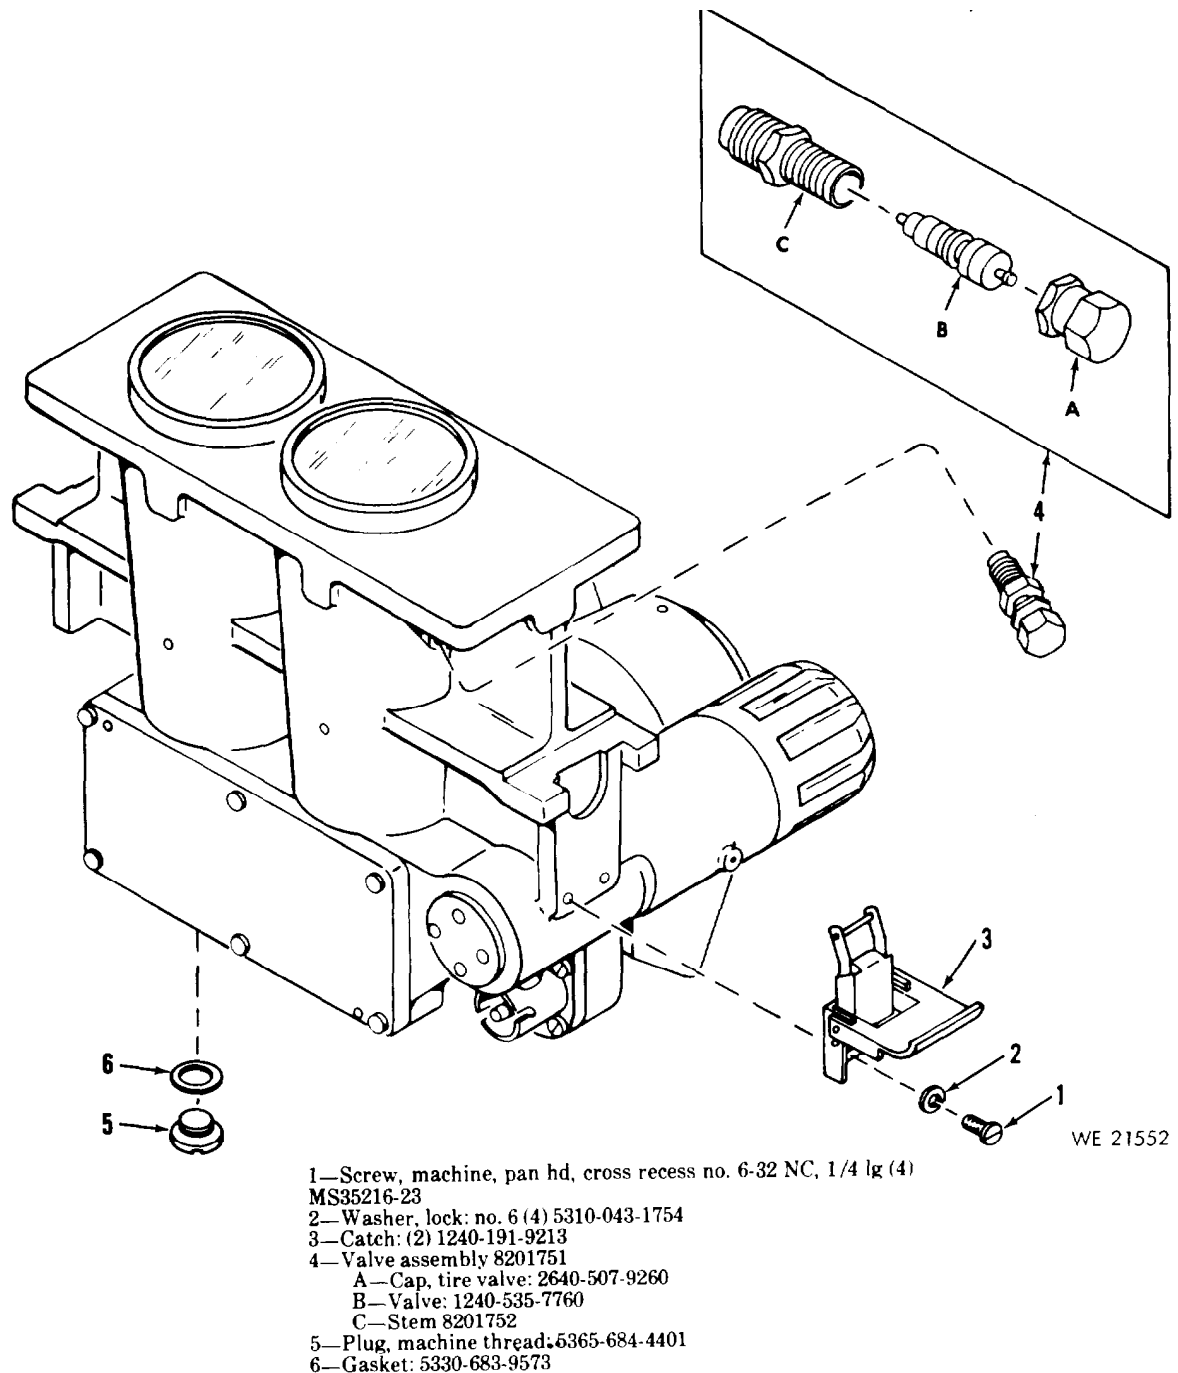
Exterior parts body assembly 10513599--partial exploded view.
